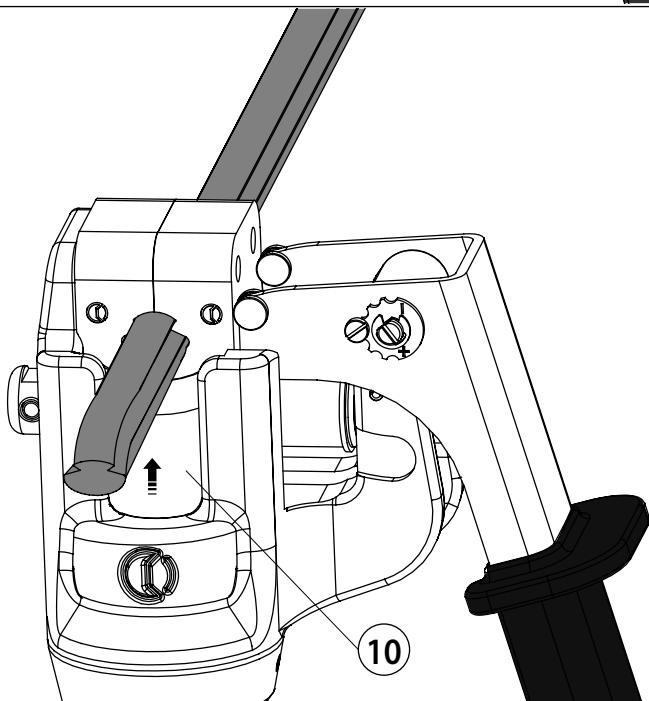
CUTTING - COUPE - SCHNEIDEN - CORTE - TAGLIO
